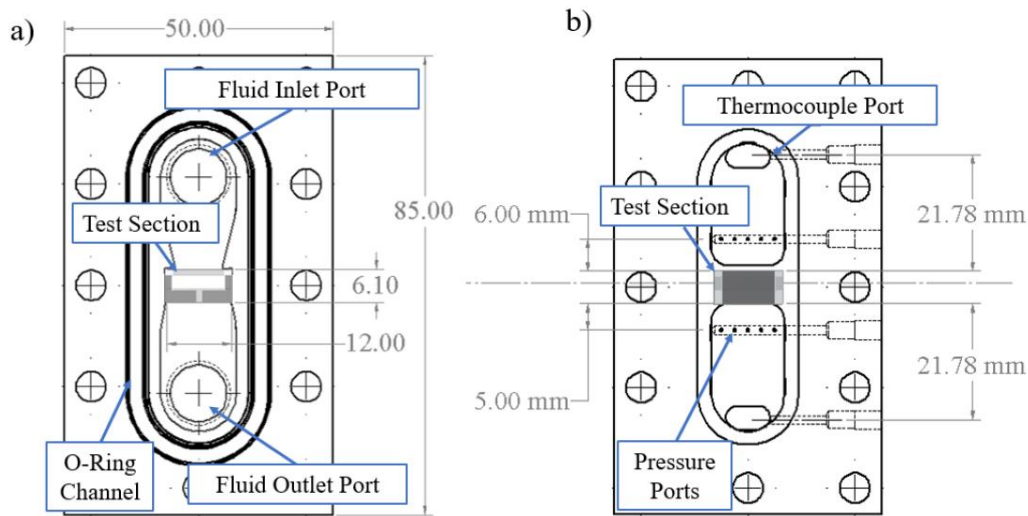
Internal schematic of manifold. Bottom view drawing of the manifold PEEK top plate with test section in place. The thermocouple ports upstream and downstream are located 21.78 mm from the inlet and outlet of the channels. The upstream pressure port is 6 mm from the channel inlet, while the downstream pressure port is 5 mm from the channel exit. The fluid travels through a 1.5 mm gap from the inlet port to the channels.
